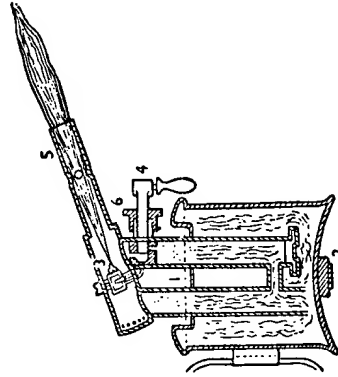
Section through a soldering blowtorch for use with aluminum. 1, basin; 2, adjuster; 3, burner nipple; 4, regulator; 5, tube; 6, square for screwing up screw of regulator.
